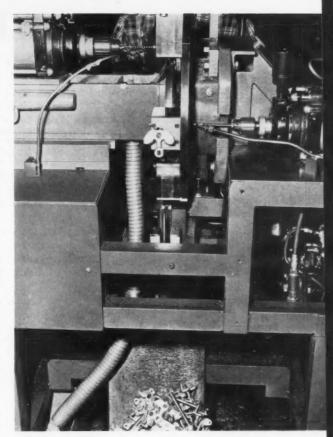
Inserting a red and bracket sub-assembly into a fixture at the first station of a company-built automatic drilling and reaming machine. A hydraulic cylinder holds the work in place for drilling at the second station (top).
